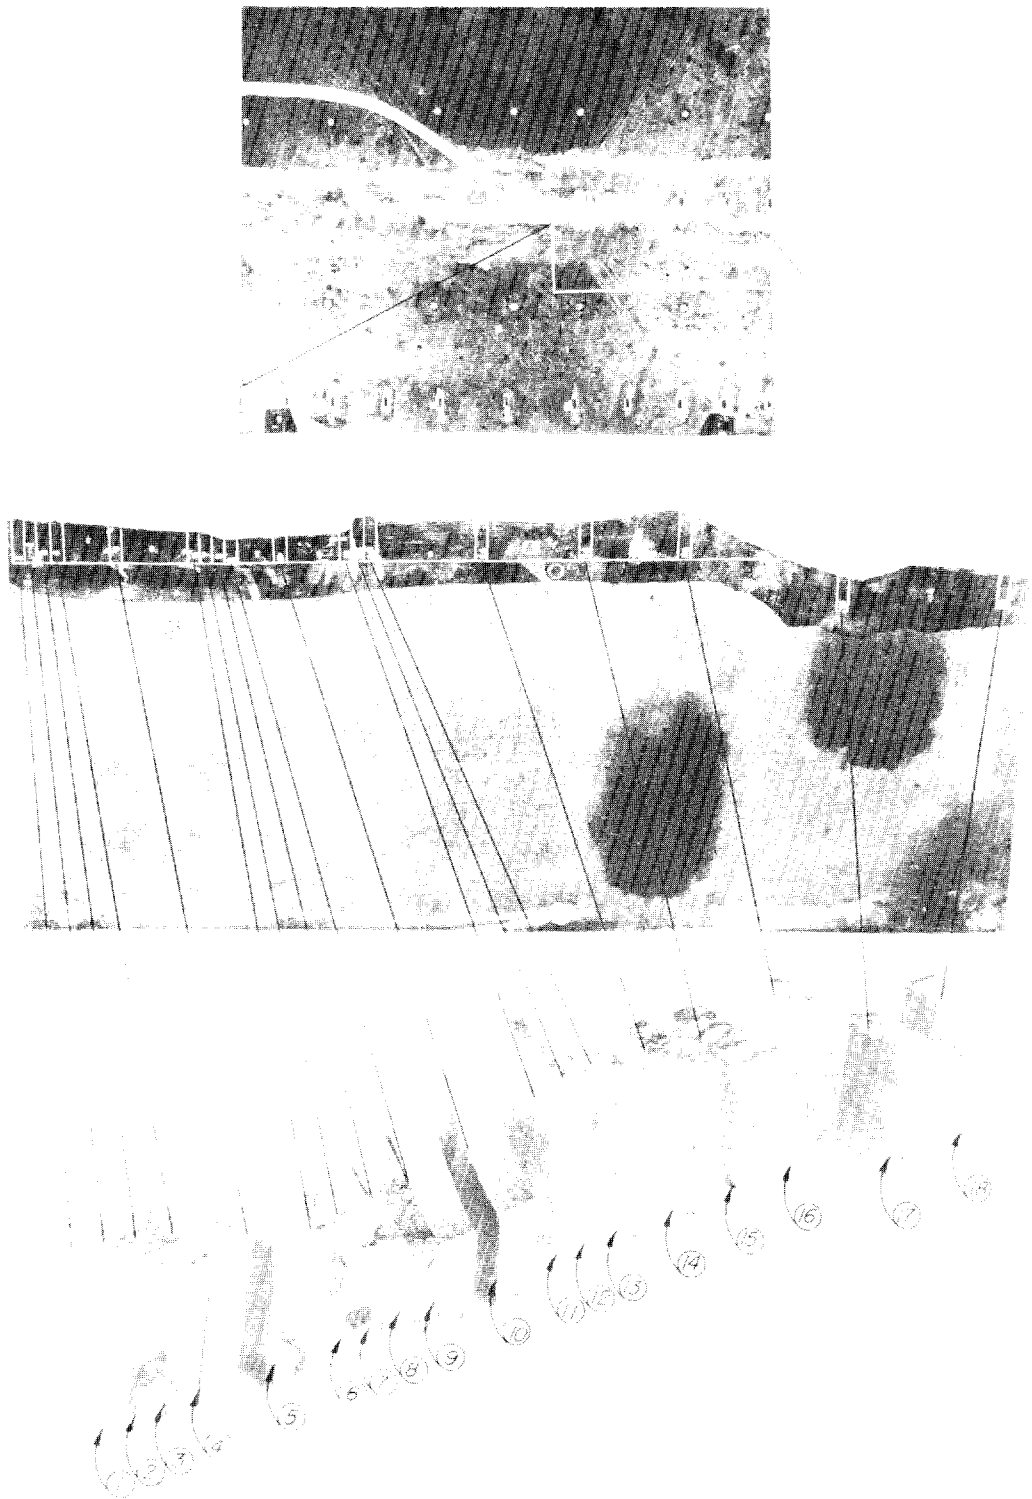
VIEW OF FRACTURED SPECIMEN C-2A SHOWING LOCATION OF SAMPLES FOR MICROHARDNESS SURVEY
